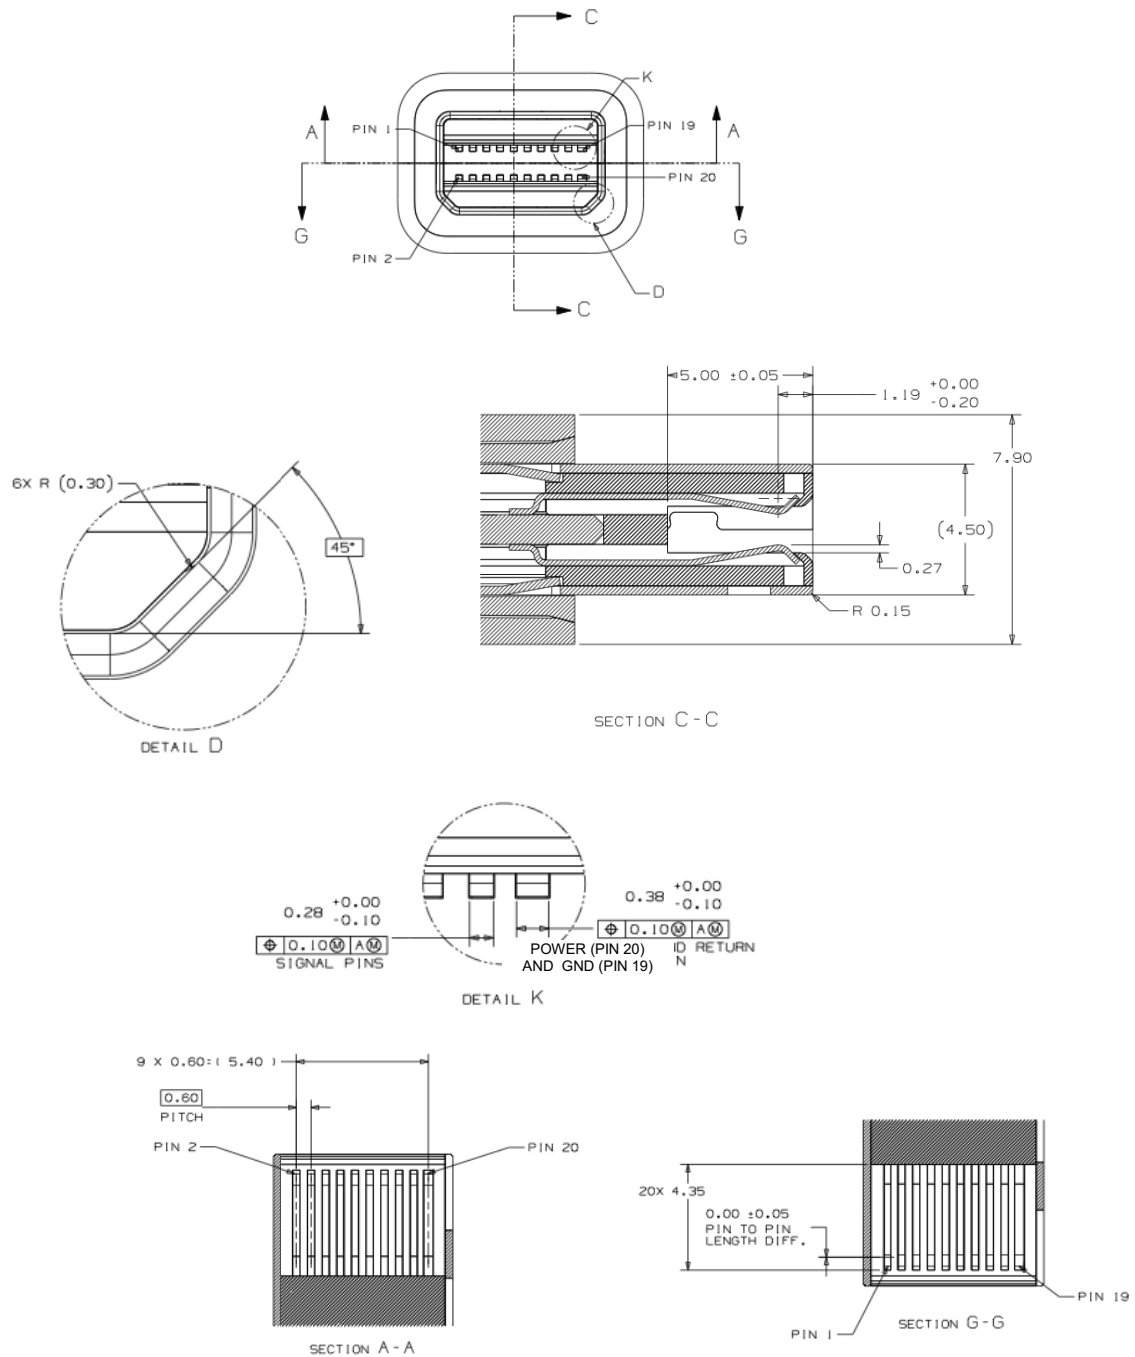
mDP Cable-Connector (Plug) Dimensions – 1
